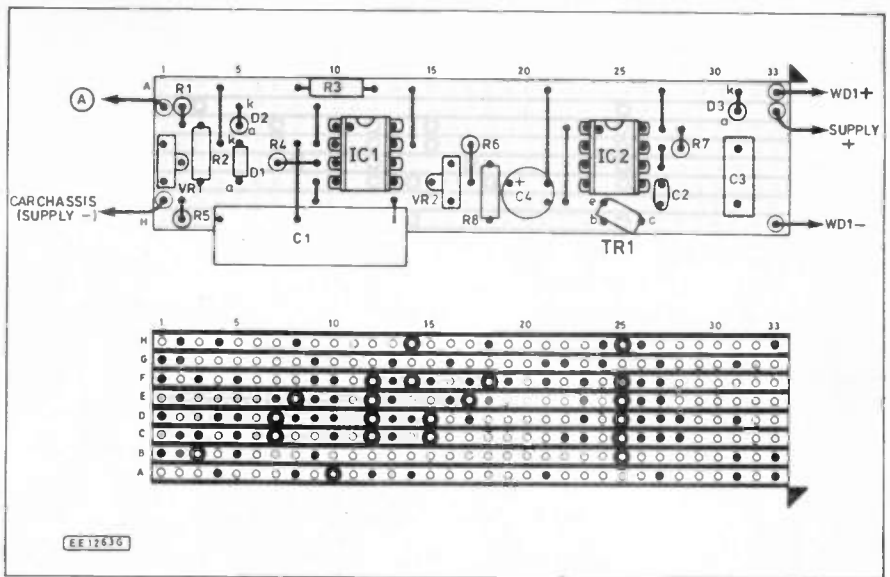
Stripboard component layout and details of breaks to be made in the underside copper tracks.
